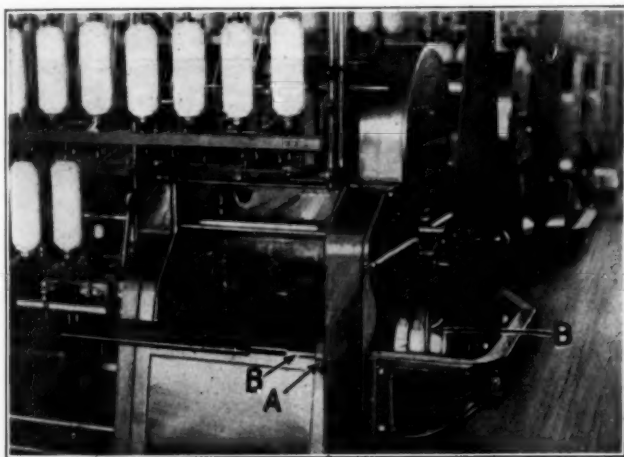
INTERLOCKING GUARD FOR HEAD GEARING OF ROVING FRAME
